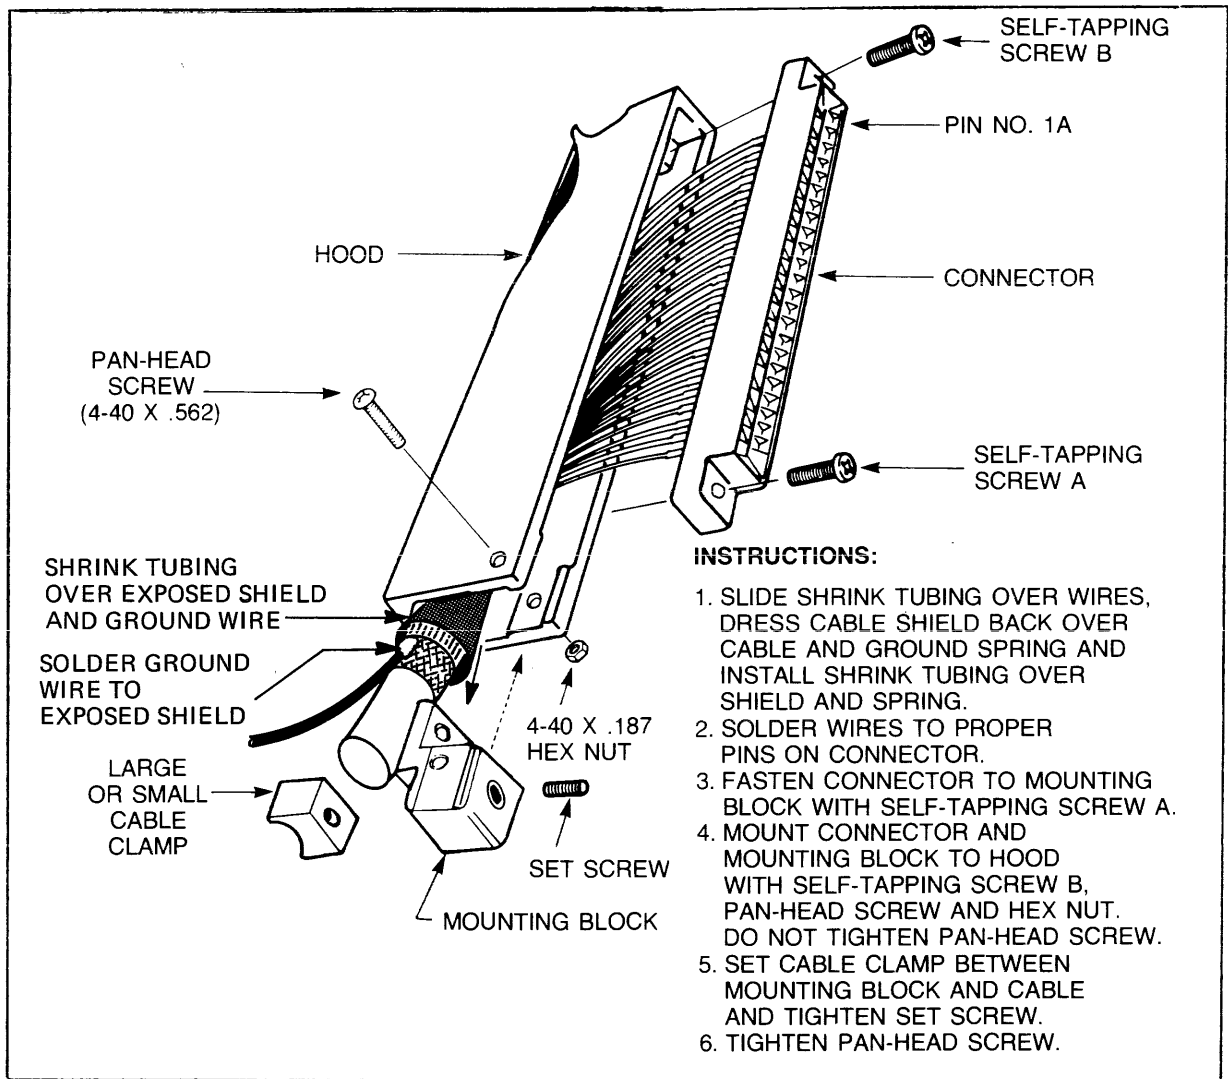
80-Pin Hooded Card Connector Assembly
